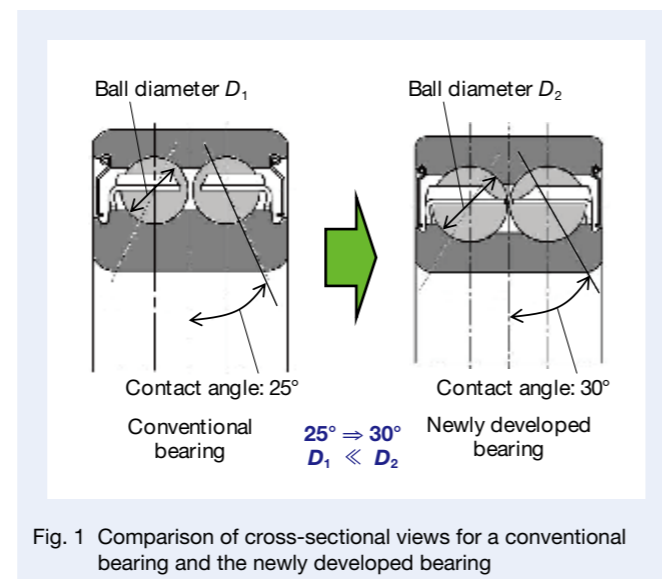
Comparison of cross-sectional views for a conventional bearing and the newly developed bearing
